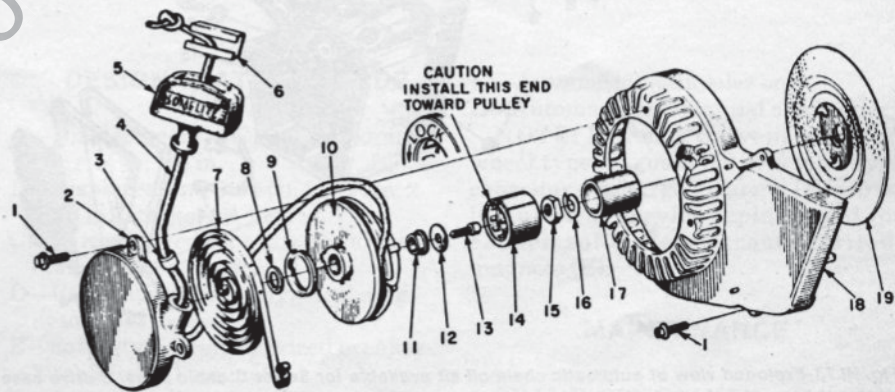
Exploded view of overrunning bearing starter used on models listed in text.
